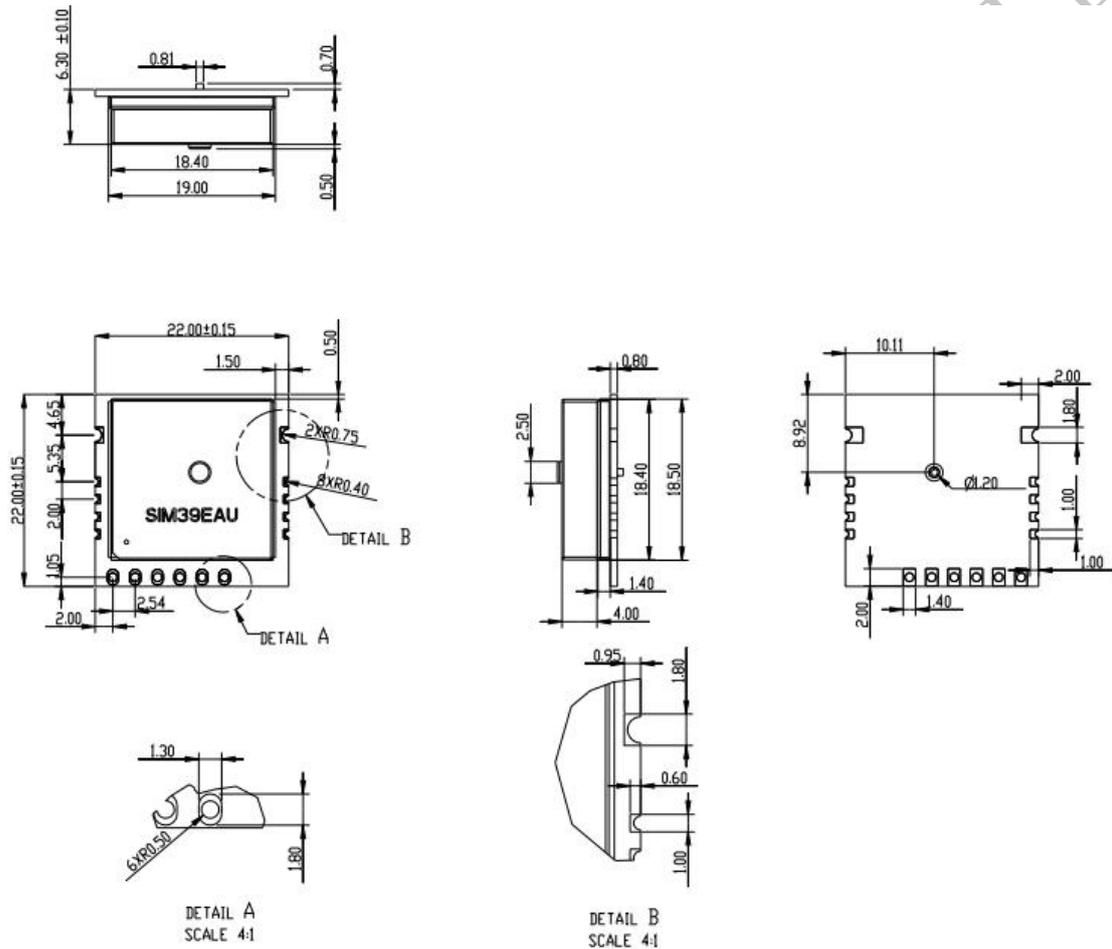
SIM39EAU mechanical dimensions (Unit: mm)
